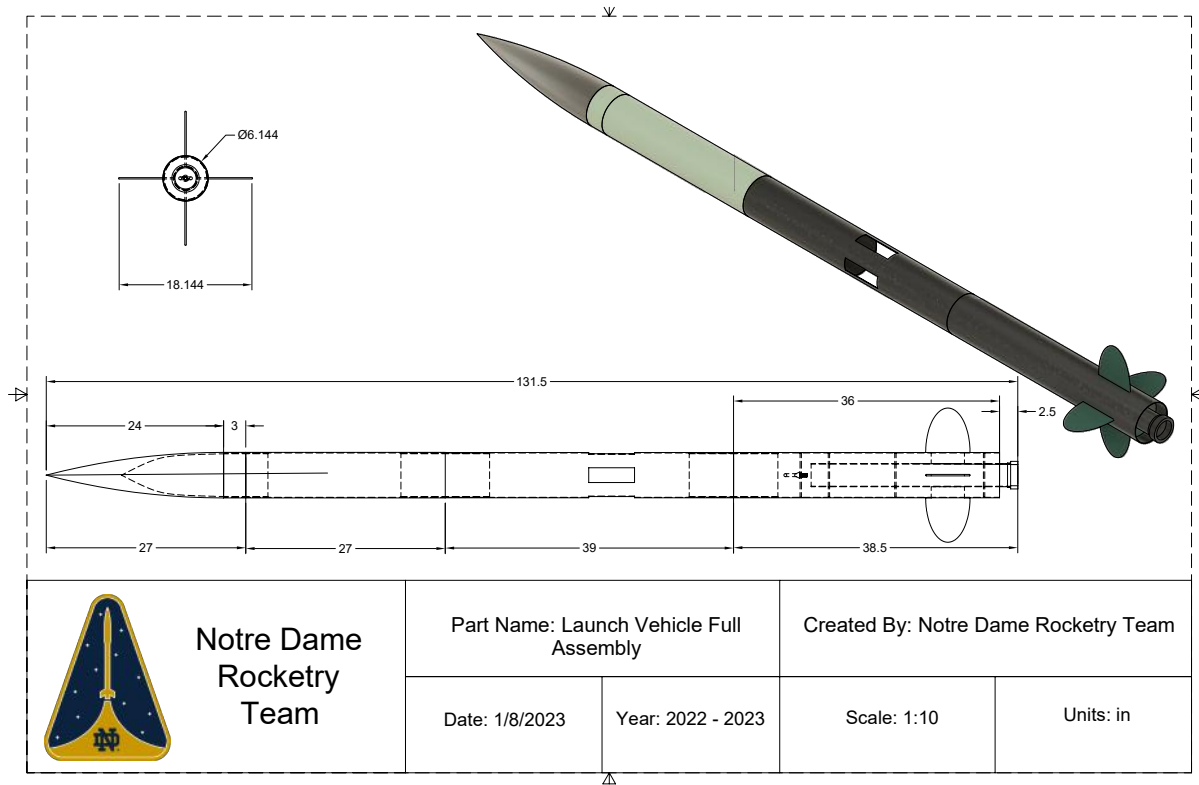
CAD Drawing of the Full NDRT Launch Vehicle
